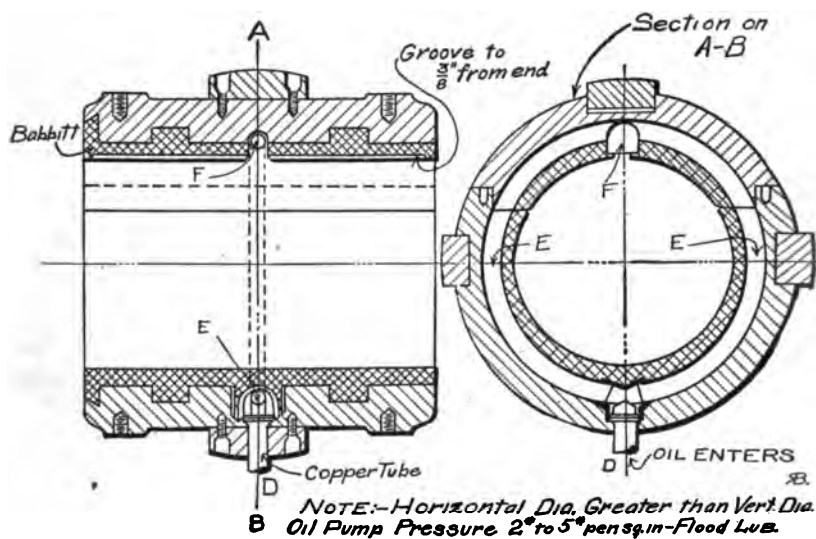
SEC. 3.—Low-speed turbine bearing.
